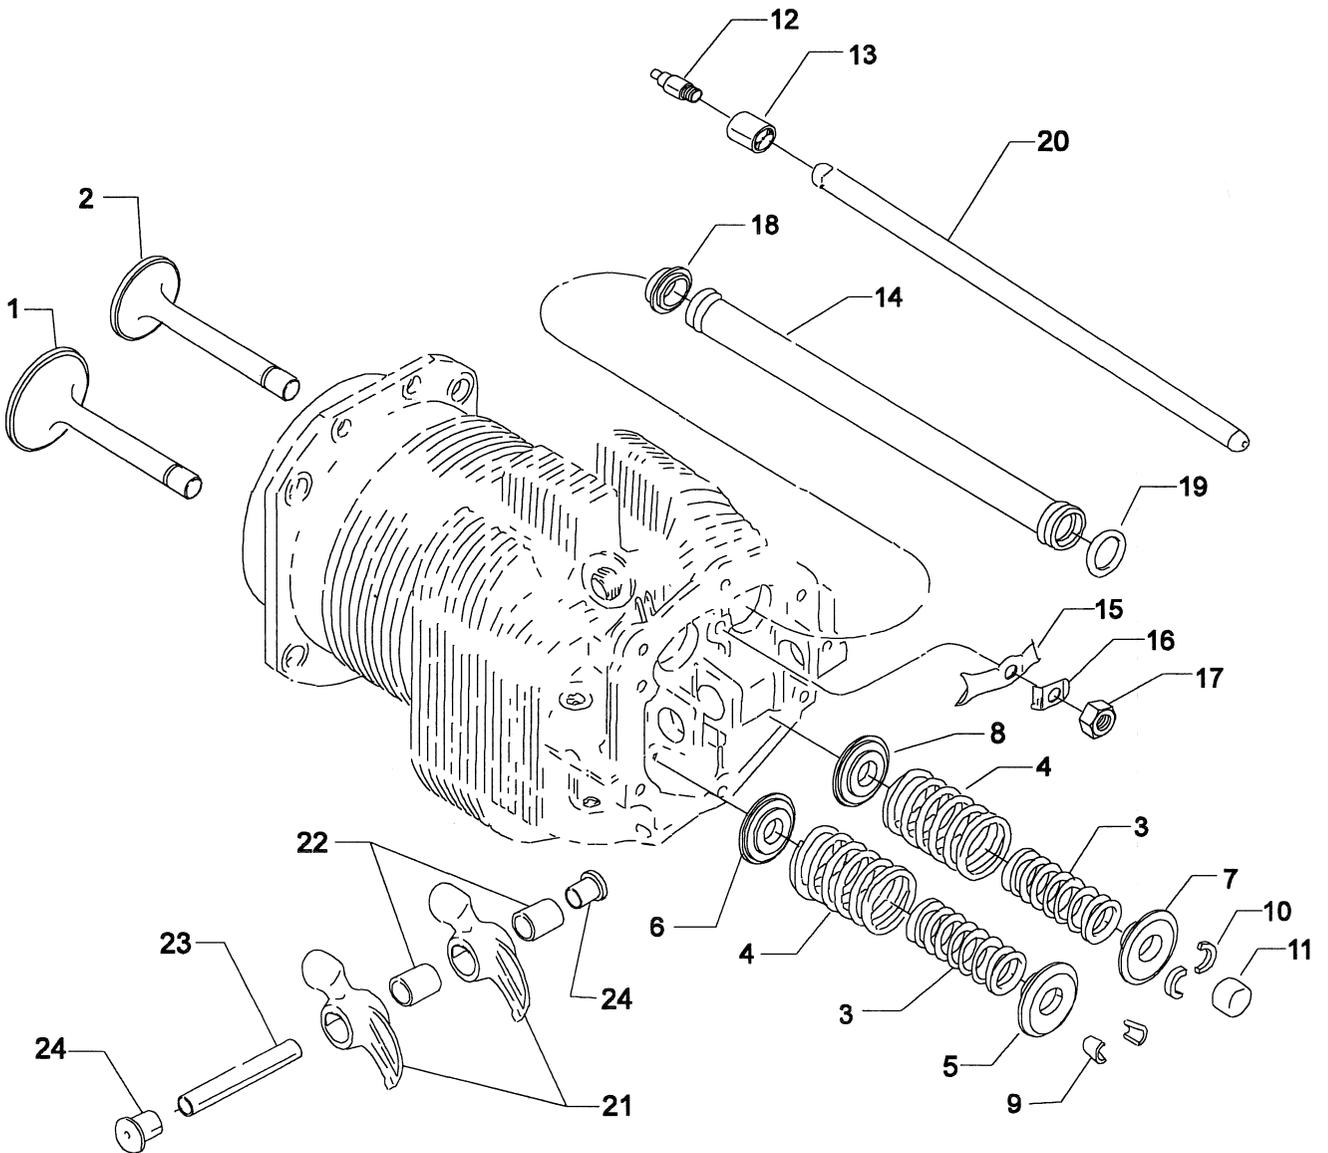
VALVE ASSEMBLY AND RELATED PARTS
